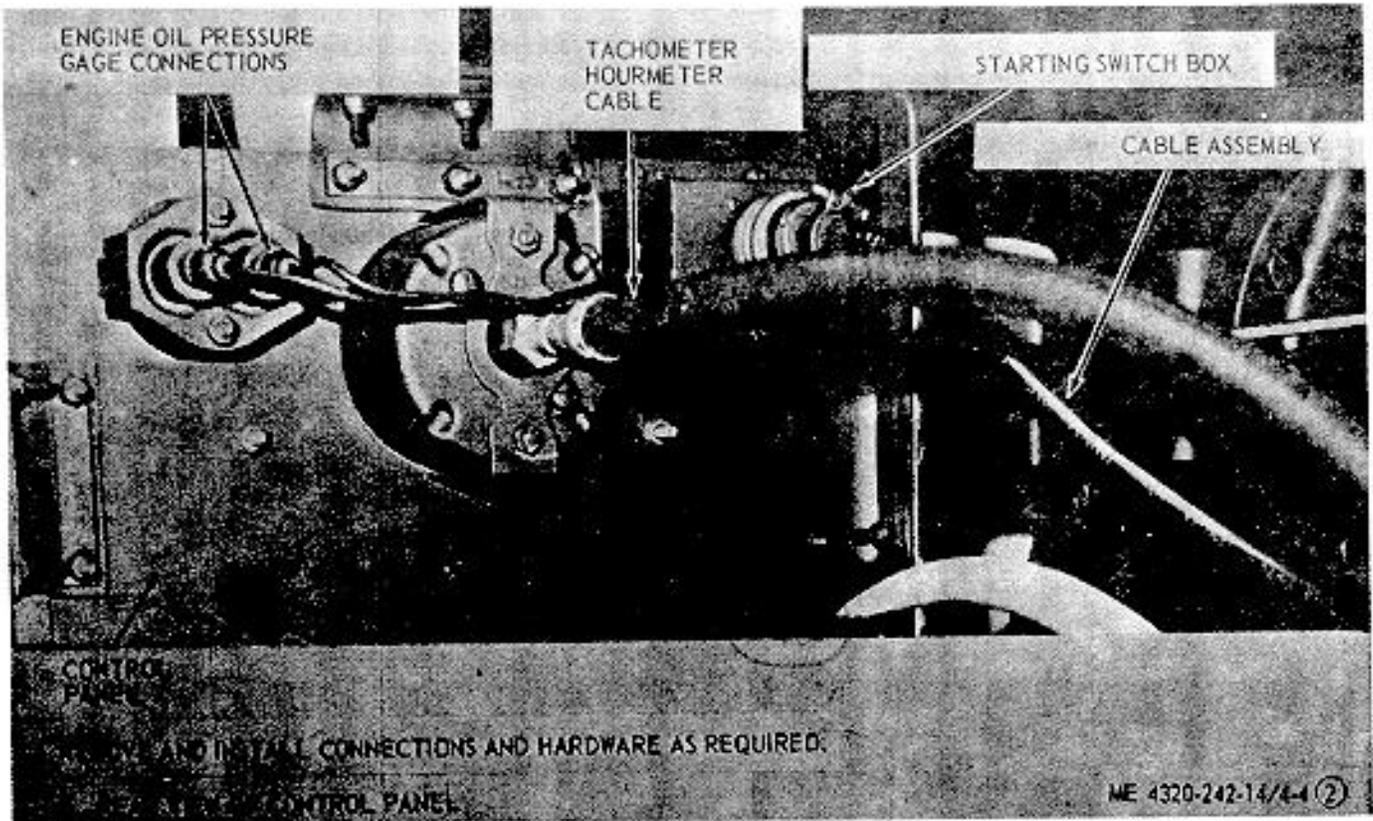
Gages and panel, removal and installation. (Sheet 2 of 2).
